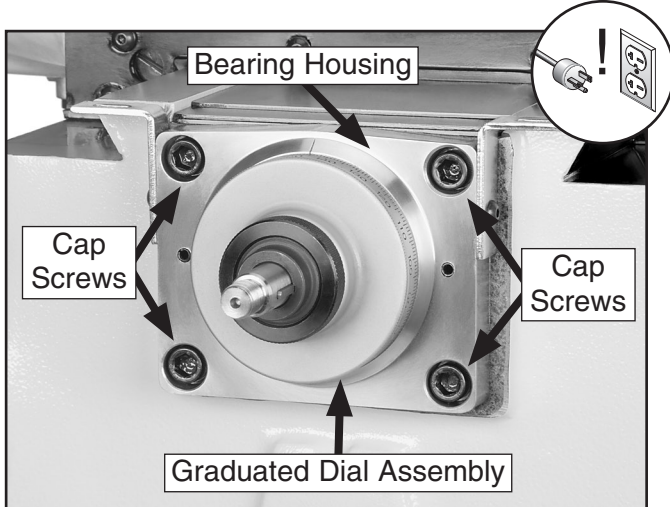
Cross feed graduated dial assembly and bearing housing with ball handle removed.
